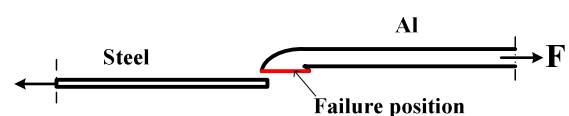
Interface fracture mode of CMT brazed lap joint:
